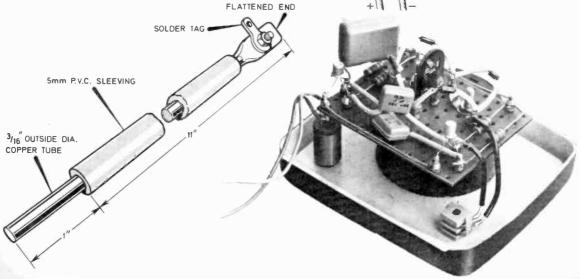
(above). The layout and wiring of the complete circuit board. This board is mounted by the meter terminals.
